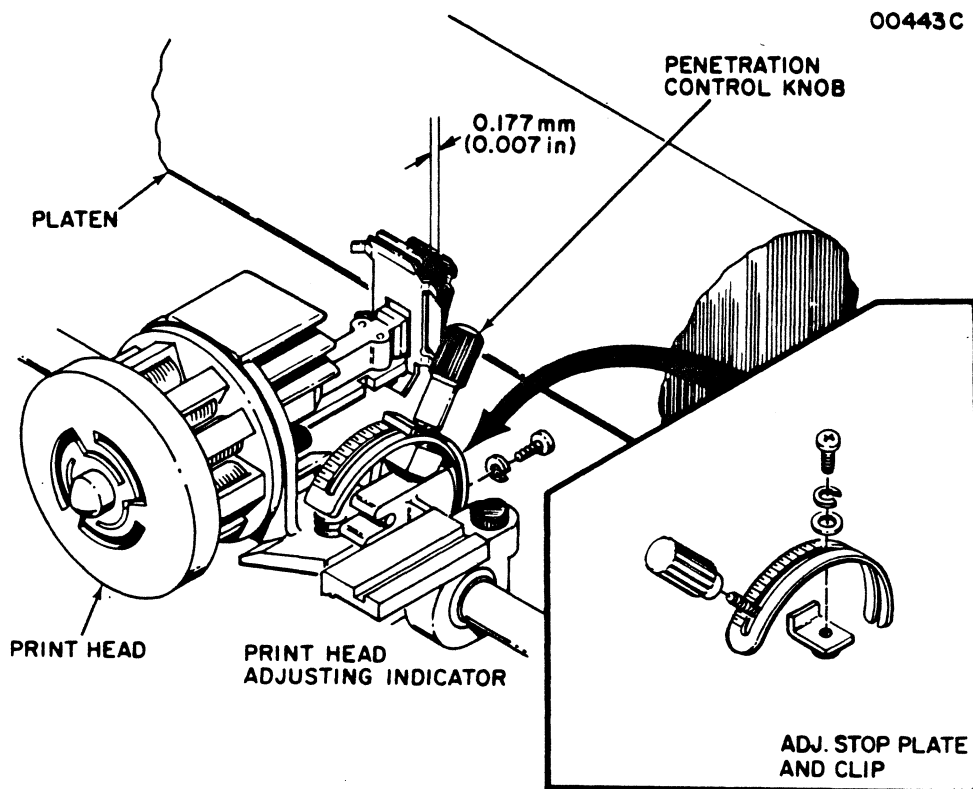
PENETRATION ADJUSTMENT, PRINT HEAD ASSEMBLY
